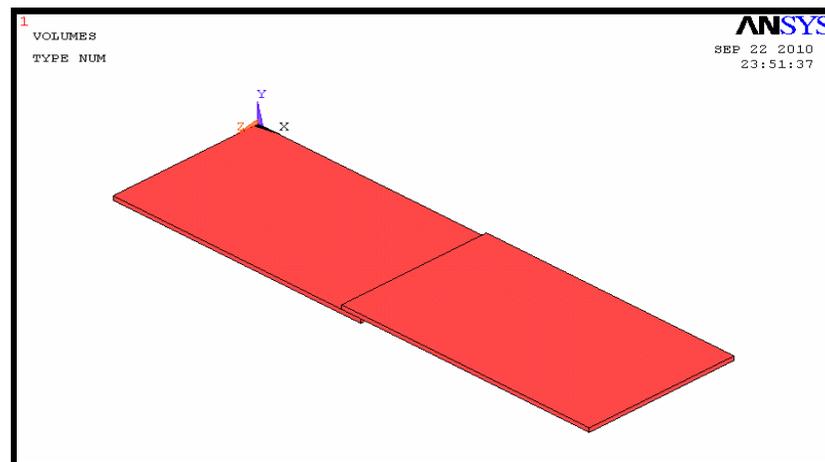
Two piece of metal lap positioned to be welded.
